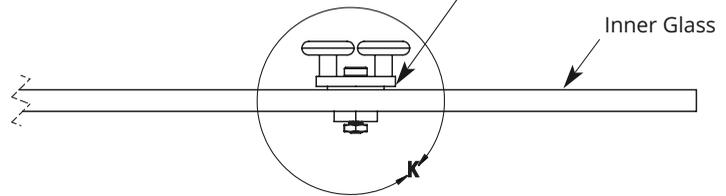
C -- Inner Roller Assembly (as supplied assembled)
